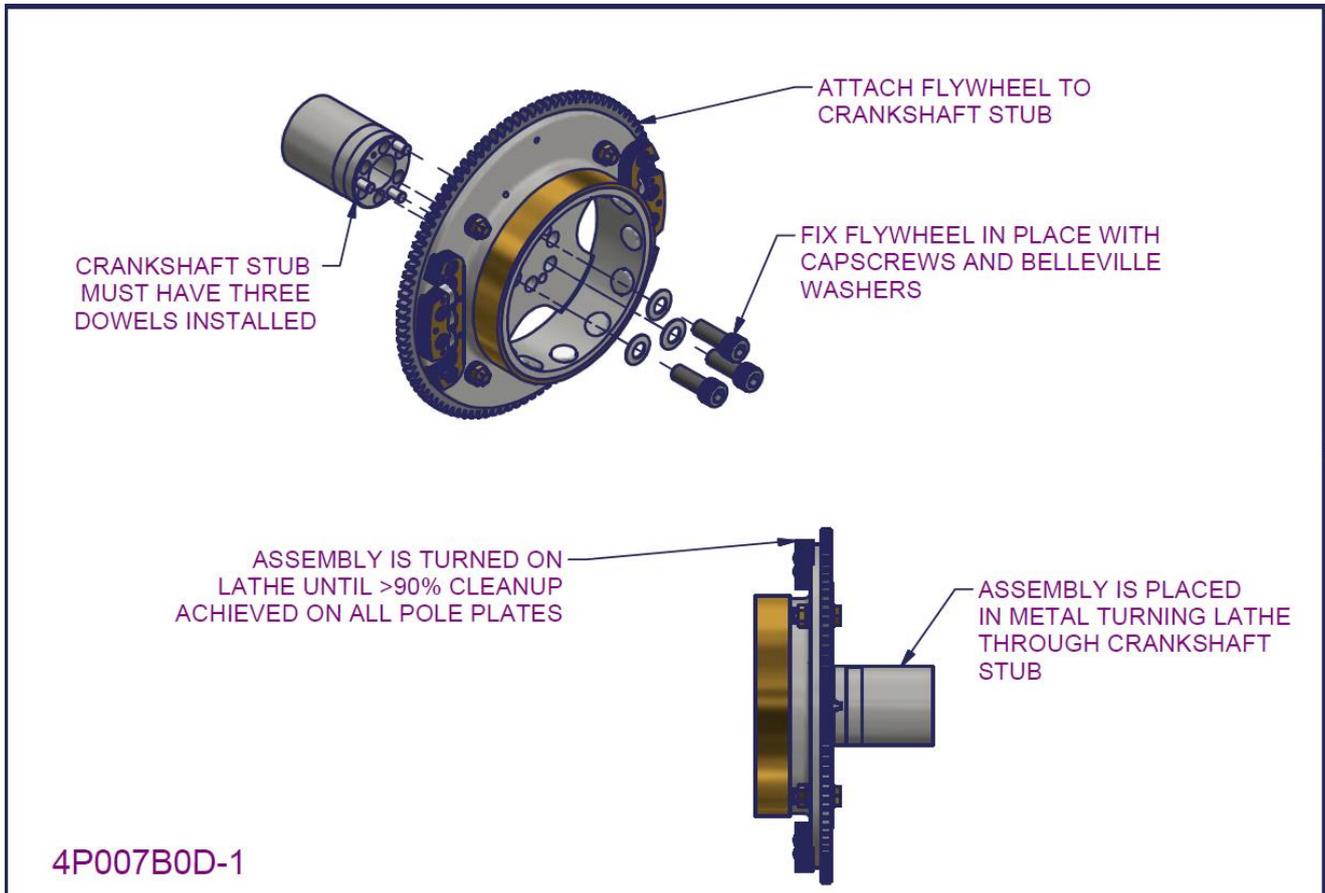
2200/3300 Flywheel subassembly (aluminium cross piece) 6
